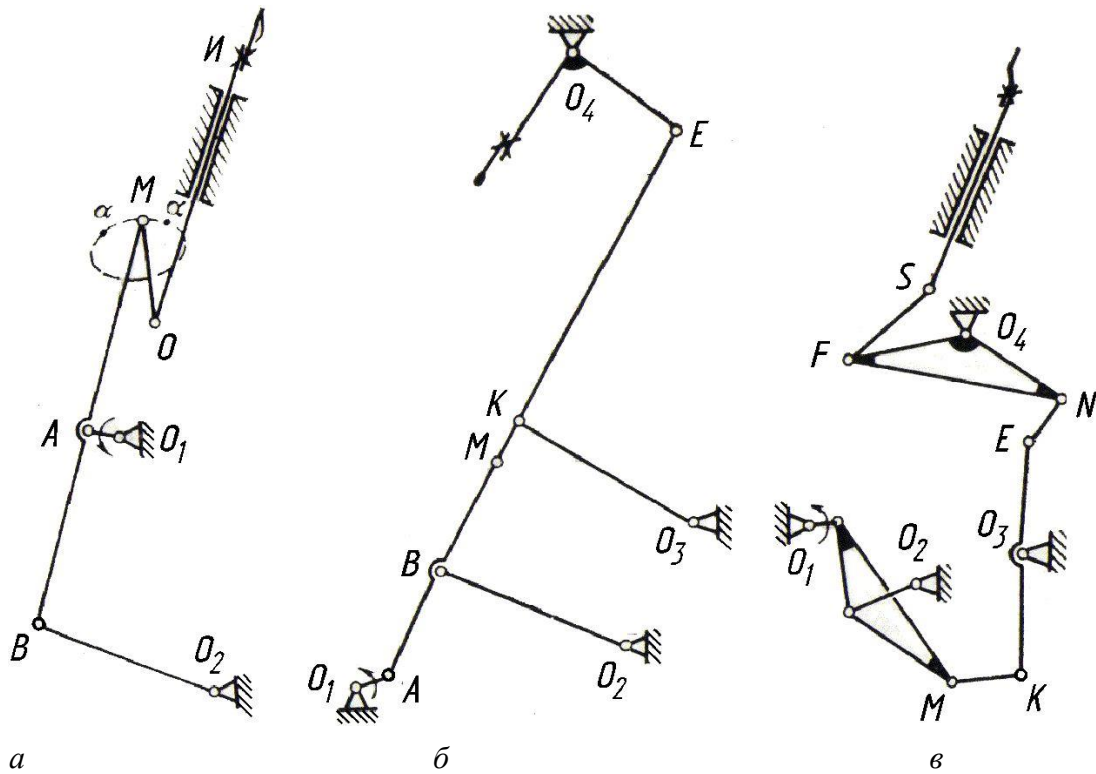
Linkage mechanisms for “Kokett” warp-knitting machine [2]
